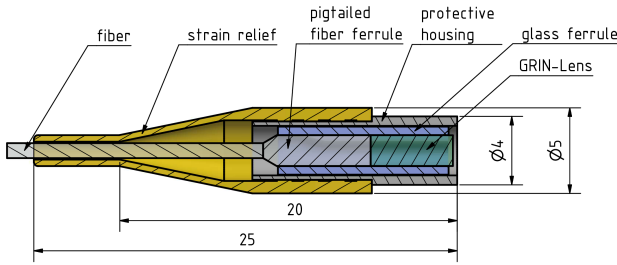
The drawing of a developed measurement head with a GRIN-Lens collimator, with key assembly dimensions marked.
